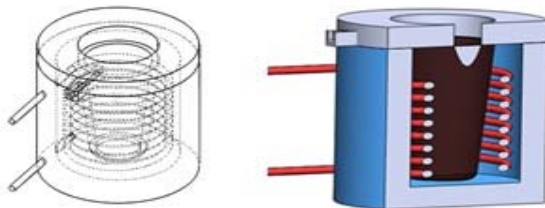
The model of crucible and combustion area inside the electric metal melting furnace.
